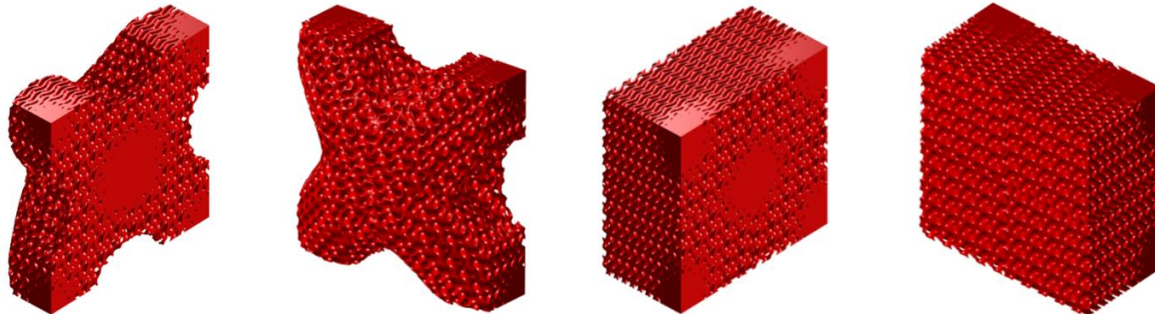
3D wheel Design ($c_0 = 0.2$): (a) Front view, and (b) Rear view; 3D wheel shape preserving design ($c_0 = 0$): (c) Front view and (d) Rear view
